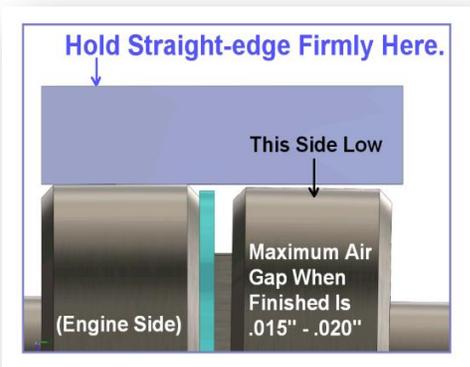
Check the alignment now by placing a straight-edge across the tops of the two coupling halves. The straight-edge must be held firmly to the engine side of the coupling as shown on the left in this photo. Use feeler gauges to determine if and
